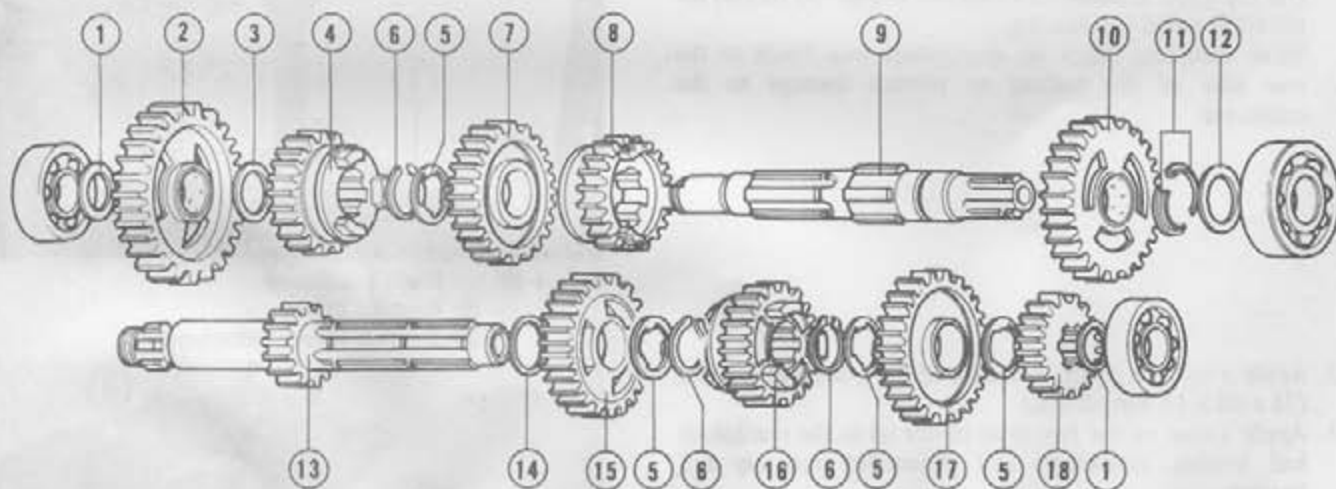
① 17.2mm thrust washer ⑩ Countershaft 2nd gear
